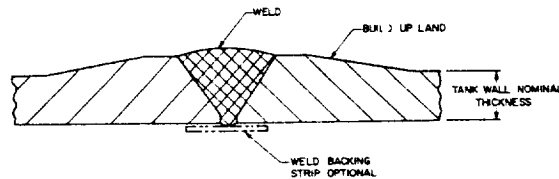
Design detail of a typical full-penetration, single-welded butt joint for propellant tanks.
